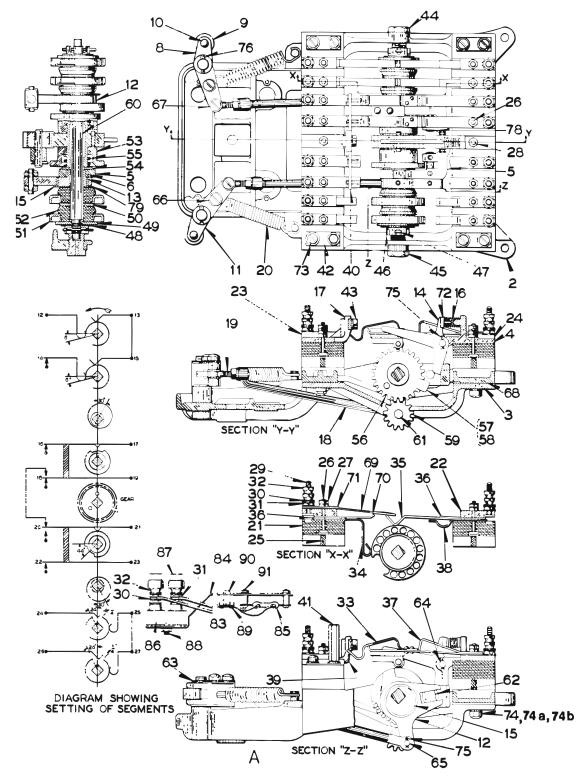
Circuit Controller With Selective Point Detector for M-3, M-23A, and M-23B Switch Machines
